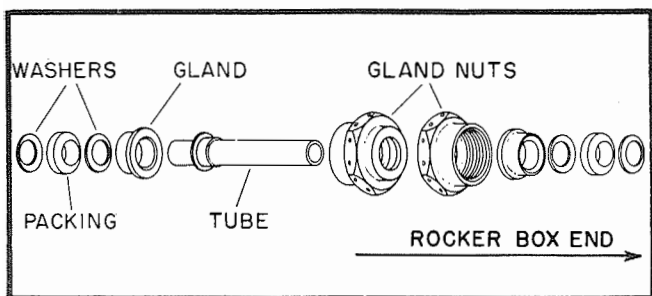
Rocker Box to Drain Manifold Tube Assembly
